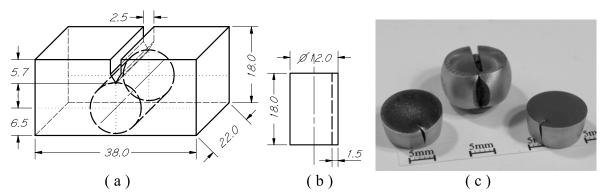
Sketched procedure to manufacture a cylindrical upsetting specimen with a vertical pre-crack (b) from a SENB specimen (a); (c) shows a compressed specimen and two halves of a split sample.
